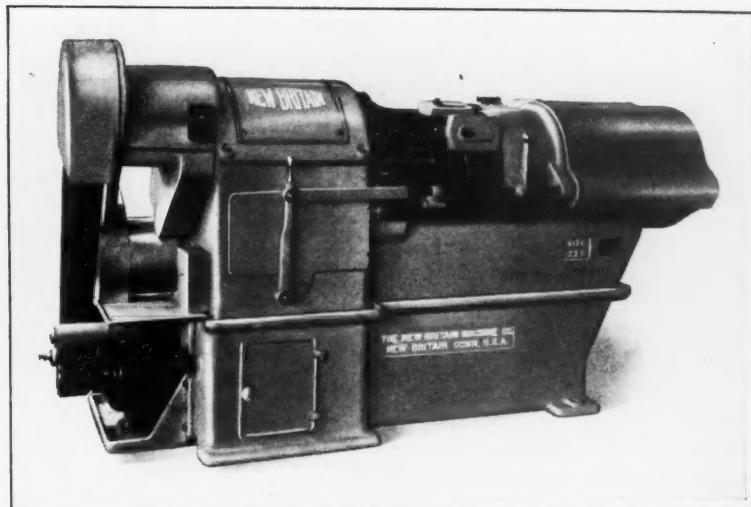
Front View of New Britain Four-spindle Automatic Chucking Machine
